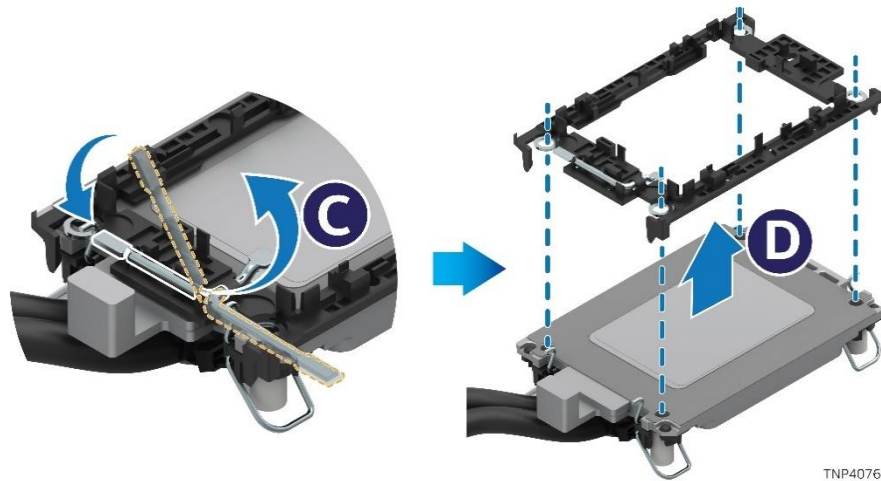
Processor Carrier Clip Removal from Processor Cold Plate
